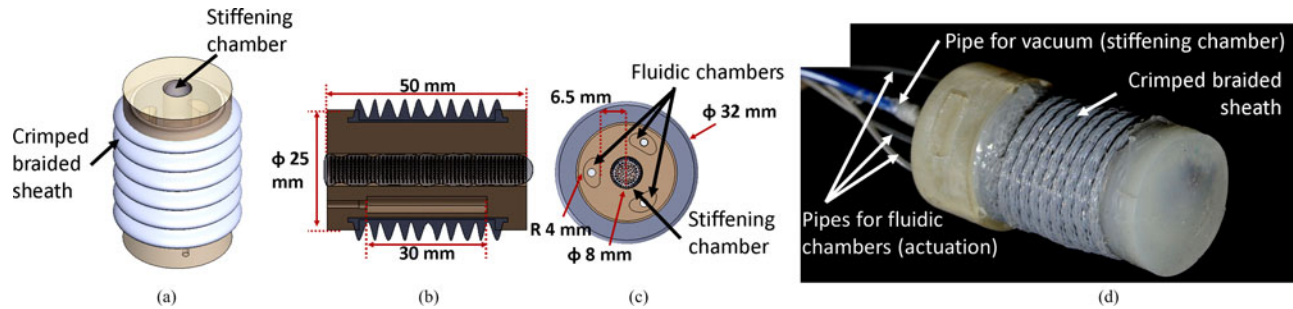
STIFF-FLOP module with its final dimensions. (a) Isometric view. (b) Lateral section view. (c) Top section view. (d) Fabricated prototype.
